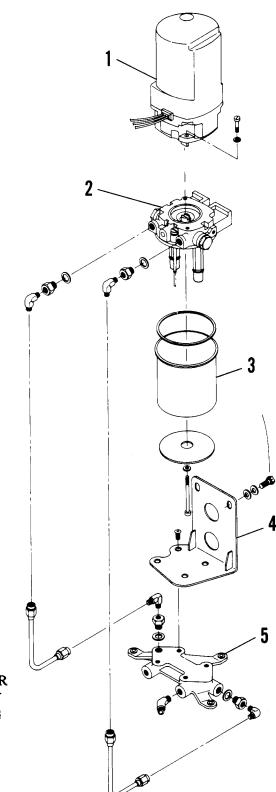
Hydraulic Pump/Reservoir, Exploded View (Prestolite)
